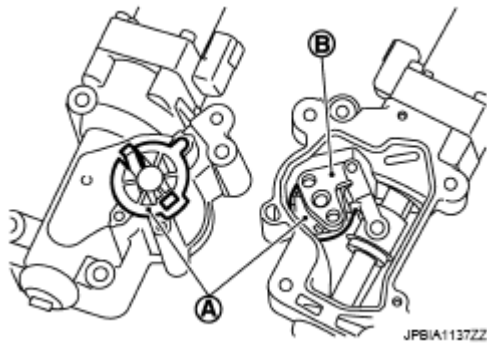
Identifying VVEL Actuator Arm And Holding Jig
